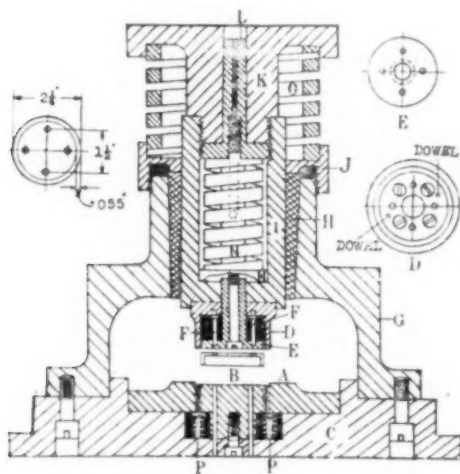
SUB-PRESS FOR BLANKING, DRAWING AND PUNCHING
